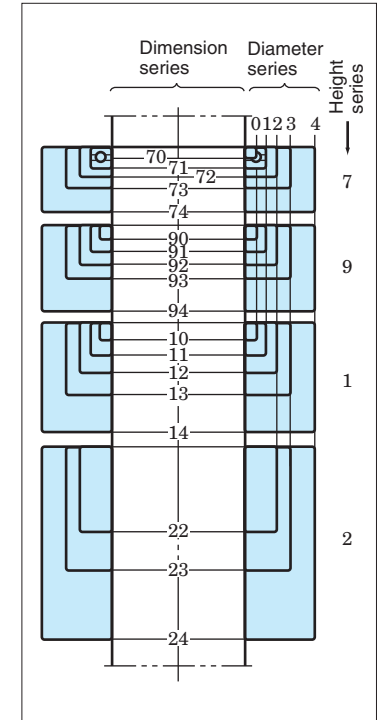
Thrust bearing dimension series diagram (diameter series 5 omitted)
